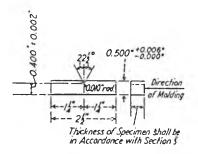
Cantilever beam (Izod type) impact test specimen dimension.
